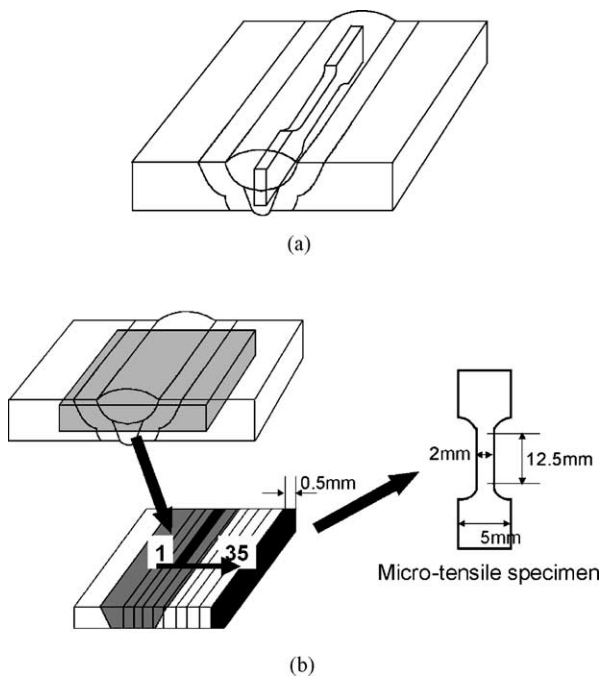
Locations of tensile specimen sampling in: (a) weld metal and (b) HAZ.
